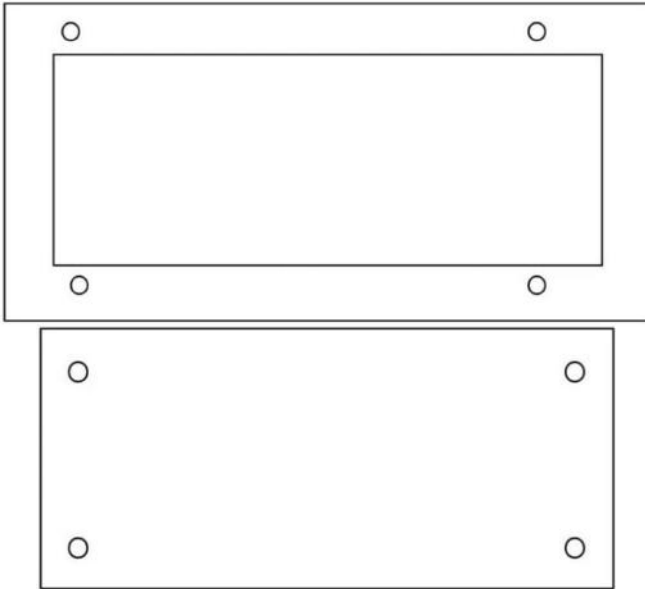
Composite surface plate to be riveted into the aluminium frame.
